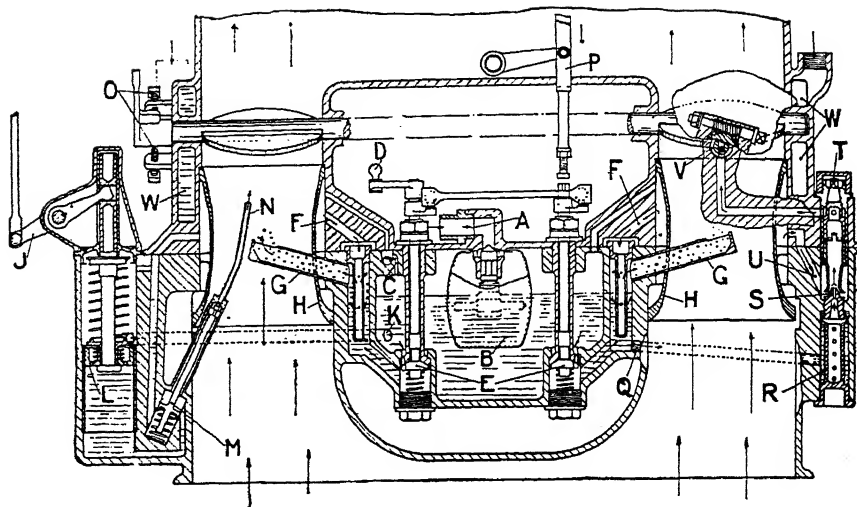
SECTION THROUGH THE ROLLS-ROYCE KESTREL CARBURETTOR
